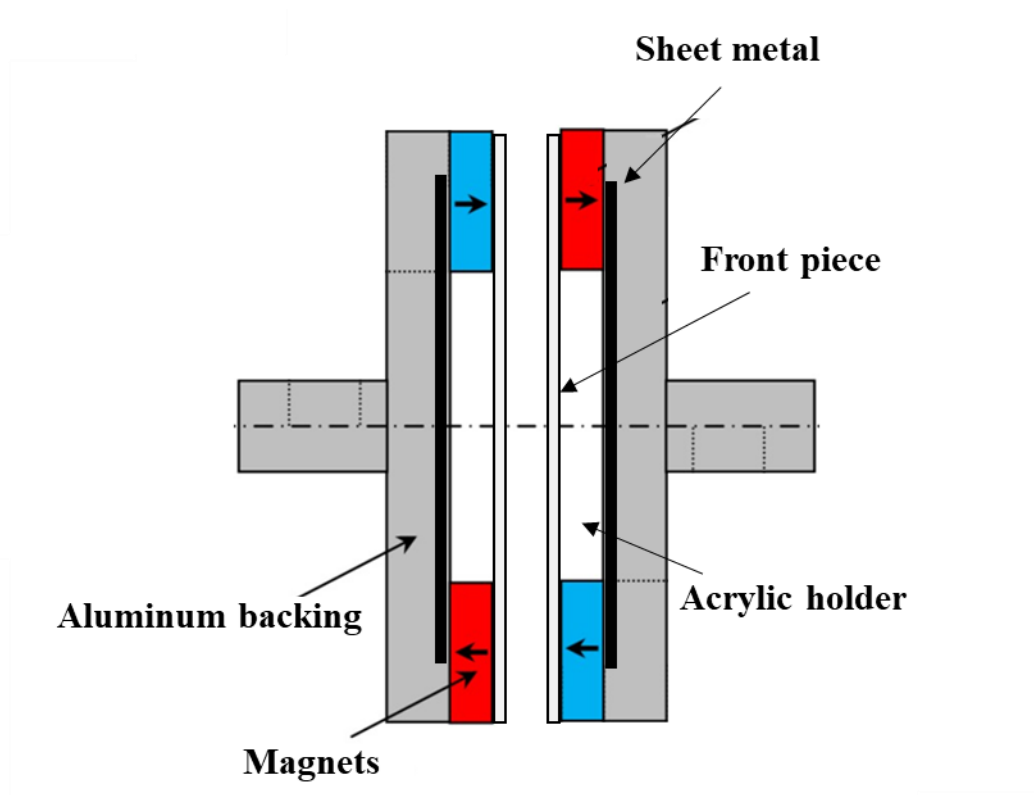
Transverse view of the created magnetic coupler showing the axles, aluminum backing, steel sheet metal, magnets, acrylic holder, and the front piece
